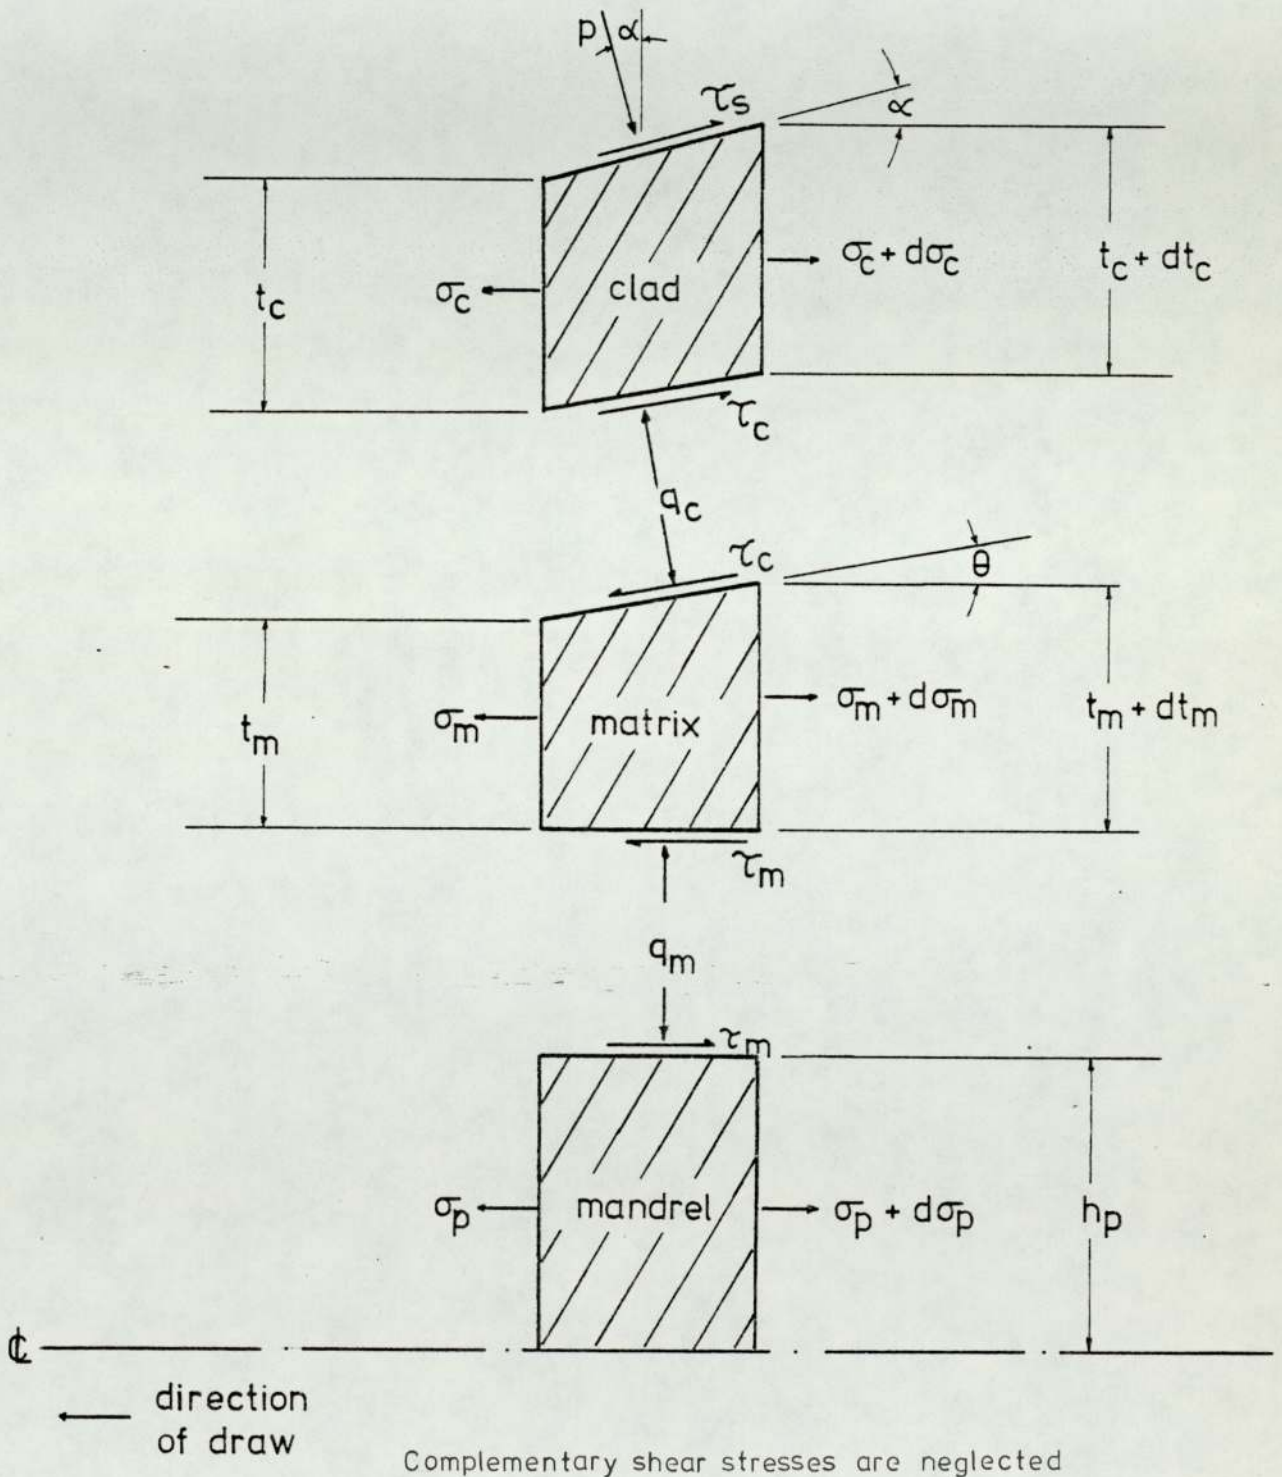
An Element of BIMETAL TUBE drawn on a mandrel through a conical die. (hard matrix)
